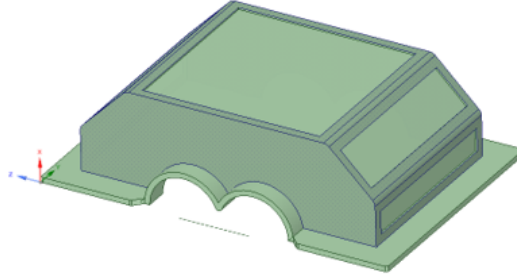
Lightweight version of the considered steel gearbox housing.
